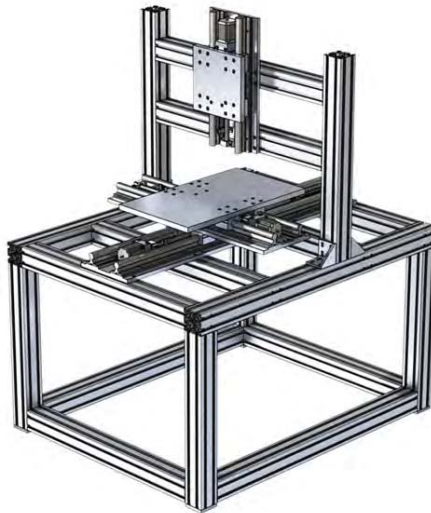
Mechanical Design – Internal frame of the printer with CNC setup
